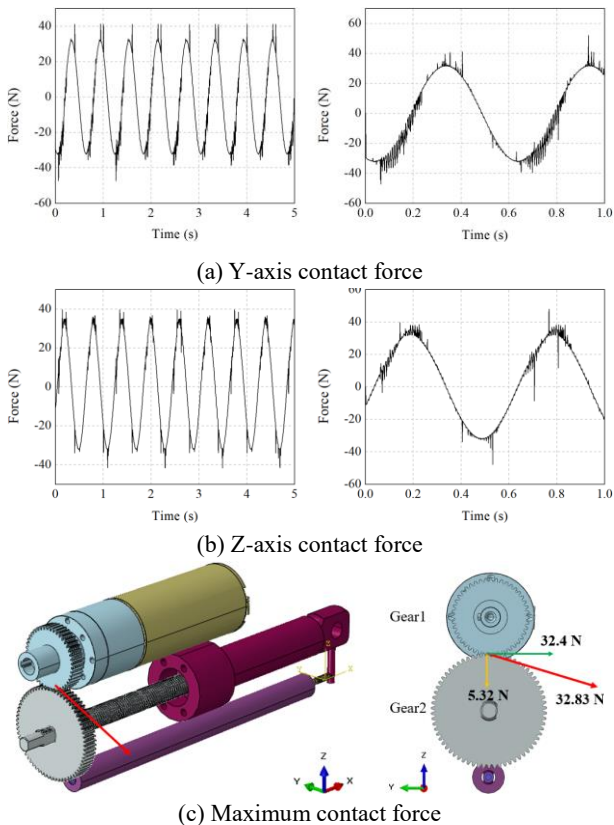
Contact forces between gear1 and gear2 한편 선형 구동기의 정적 거동 분석의 입력 데이터
